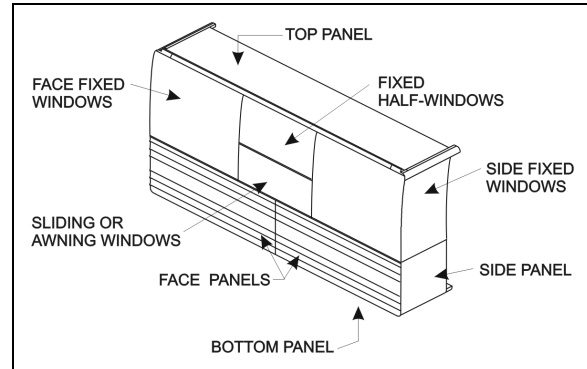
SLIDE-OUT PANELS AND WINDOWS
